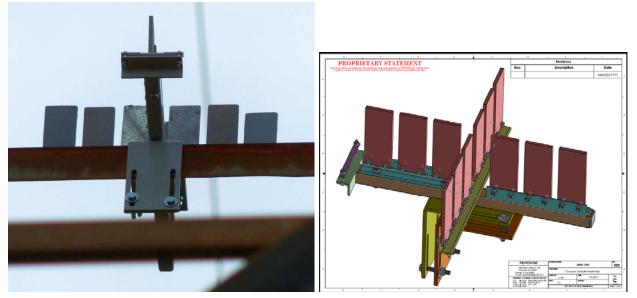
Coupon Installation Showing the Attachment Method and Clocking of Coupons, note the tensile test coupon on the front in a horizontal position
